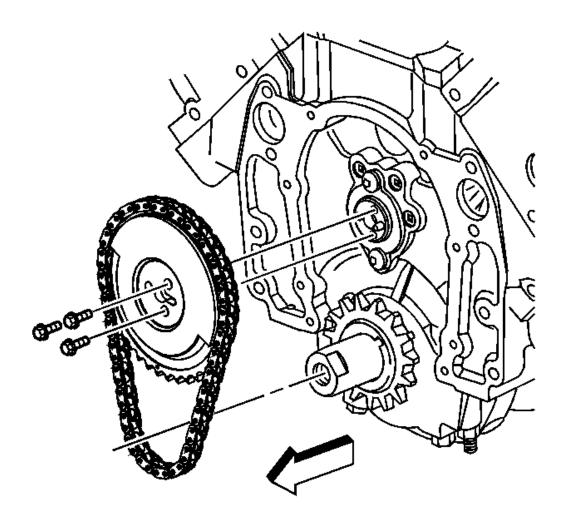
View Of Camshaft Sprocket, Timing Chain & Bolts Courtesy of GENERAL MOTORS CORP.
